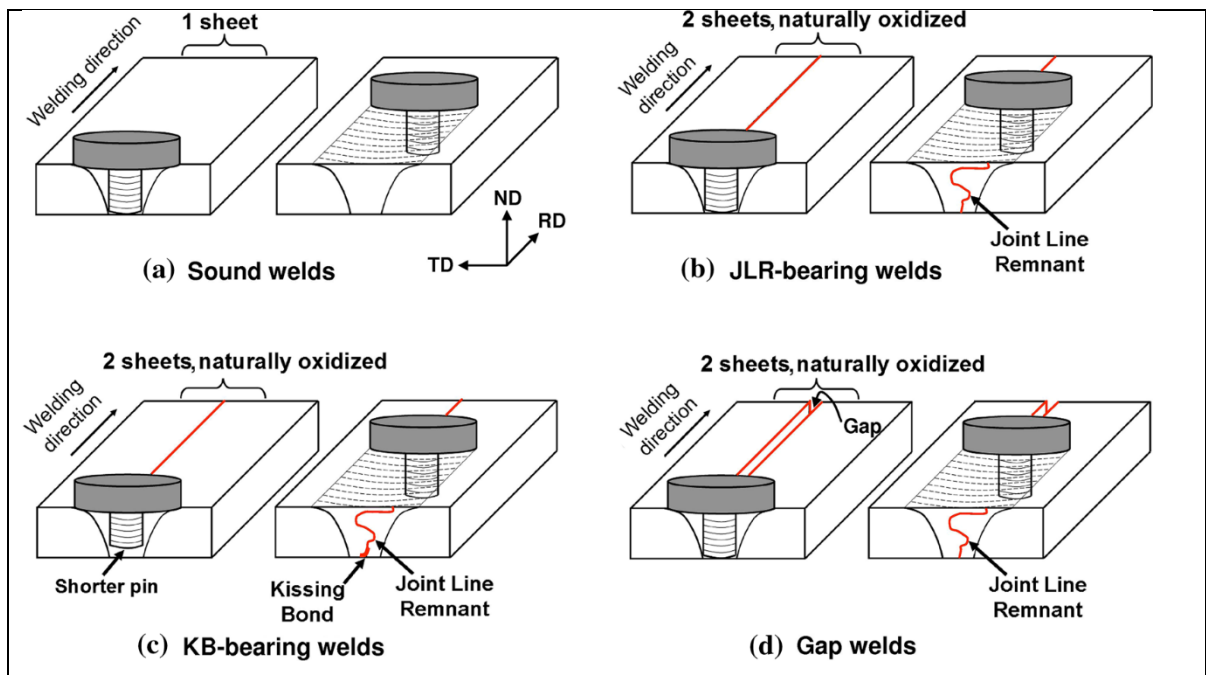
Schematic drawing of (a) “sound” welds, (b) welds bearing a joint line remnant, (c) welds bearing a kissing bond, (d) welds with a gap left between the parent sheets (Le Jolu et al., 2014)
